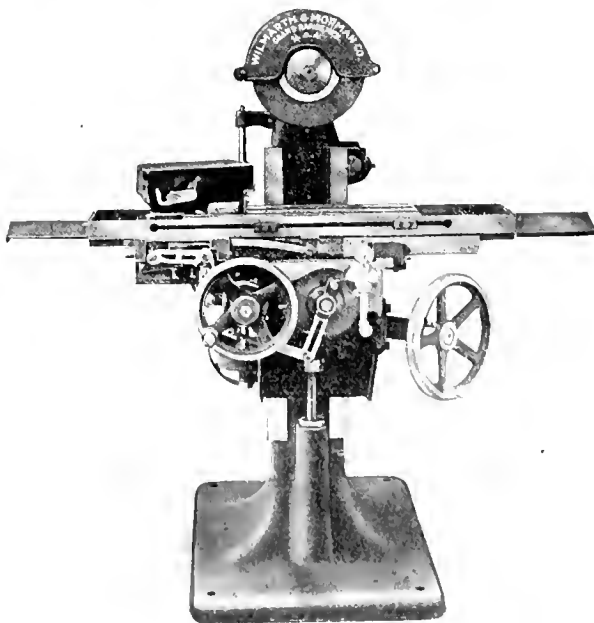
Surface Grinder with Automatic Feed Box removed to show Mechanism.
